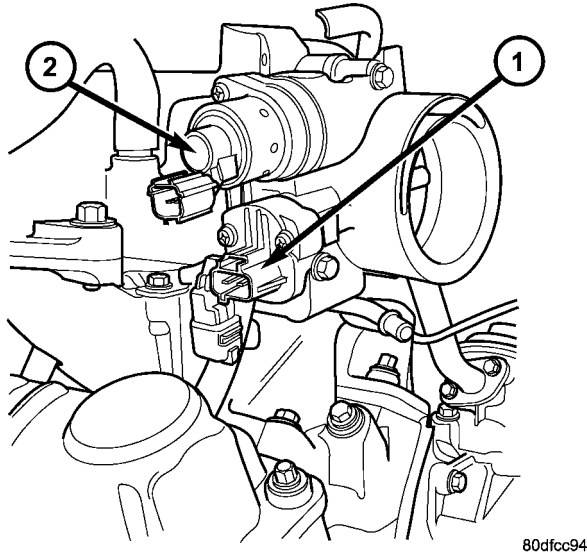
Throttle Position Sensor—3.3/3.8L Engine
